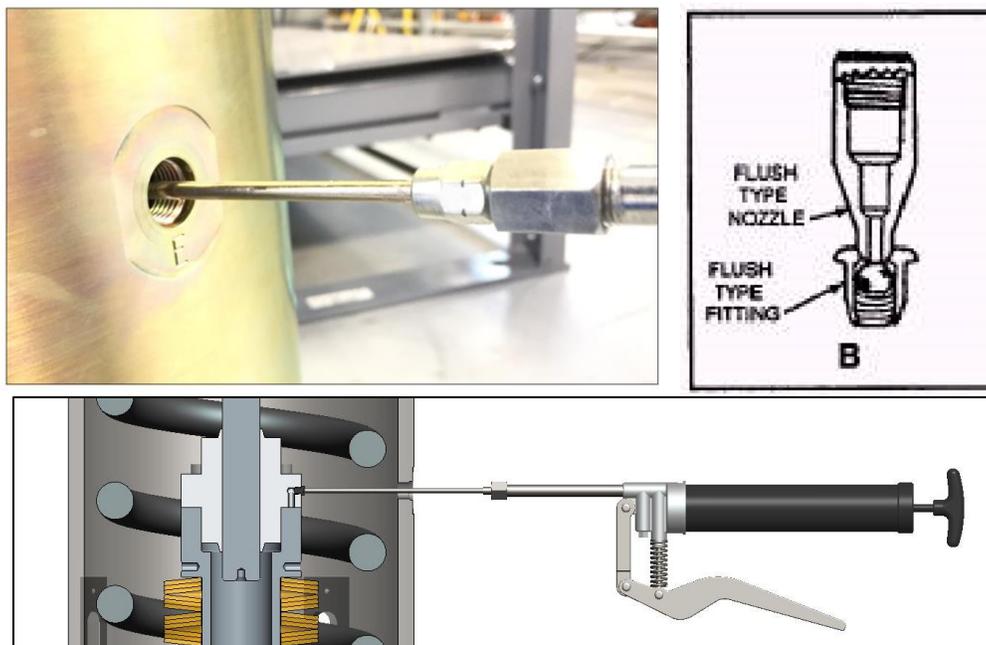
Proper Lubrication Tool to Flush Fitting Technique
